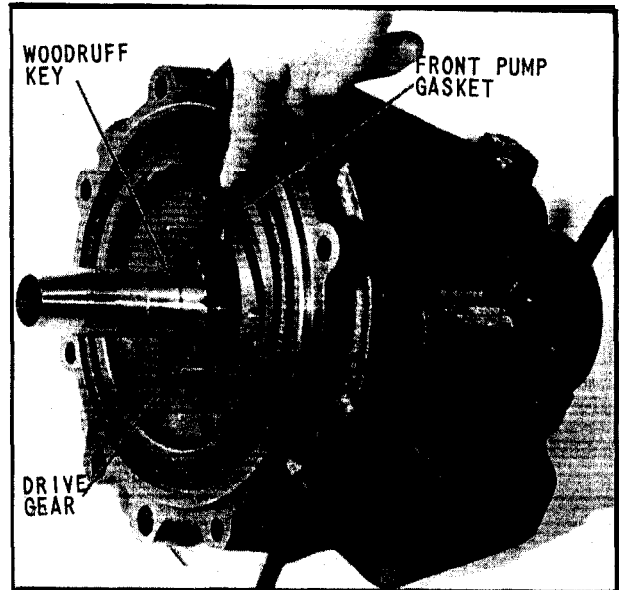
Installing Pump Drive Gear Key and Front Pump Gasket
